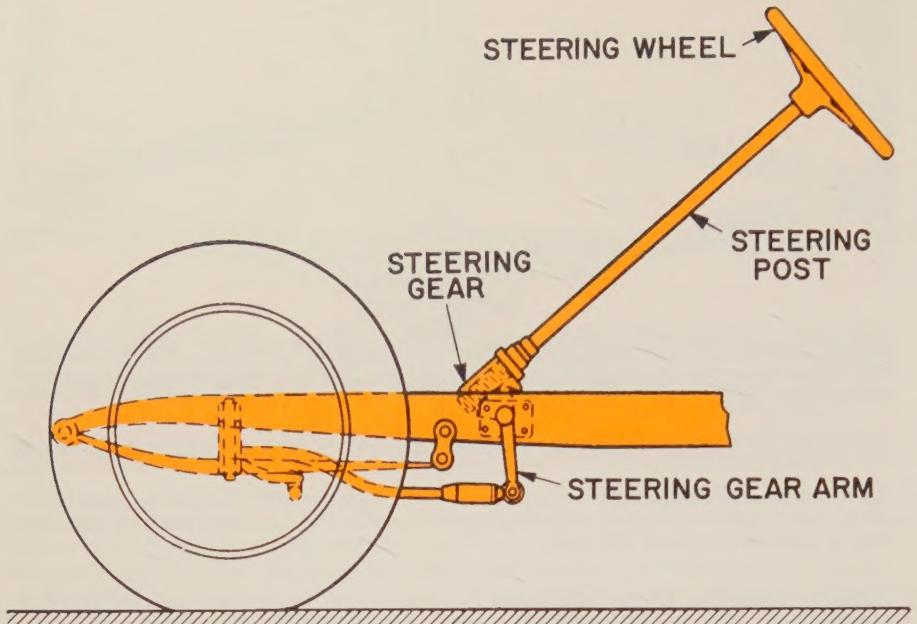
The old worm and worm-wheel principle found a new application in early steering systems. This combination in a gear box mounted on the chassis multiplied the torque resulting from the driver's hand on the steering wheel. The driven gear moved the steering gear arm fore-and-aft. Because the driver sat on the left side of the vehicle, engineers had to add an arm extending toward the vehicle's center onto the left wheel's steering knuckle.
